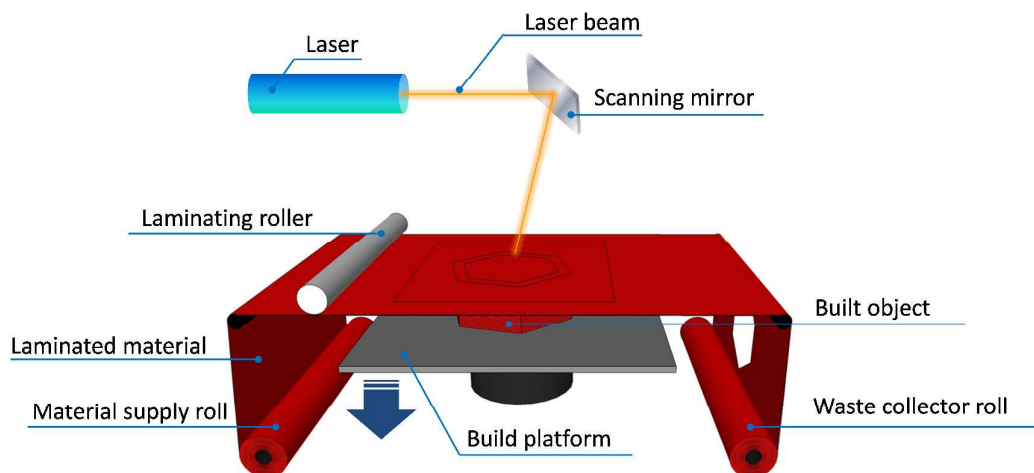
Schematic diagram of laminated object manufacturing (LOM). A first sheet of material is loaded onto the building platform. A PC-controlled cutting system consisting of a laser beam or a mechanical blade is then used to define the layer contour. Once the excess material is removed, a new sheet is loaded with a laminating roller which ensures good adhesion of the layers.
